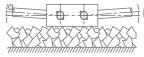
The rod body and unidirectional hinge are directly placed on the ground, and the rod body is tilted
